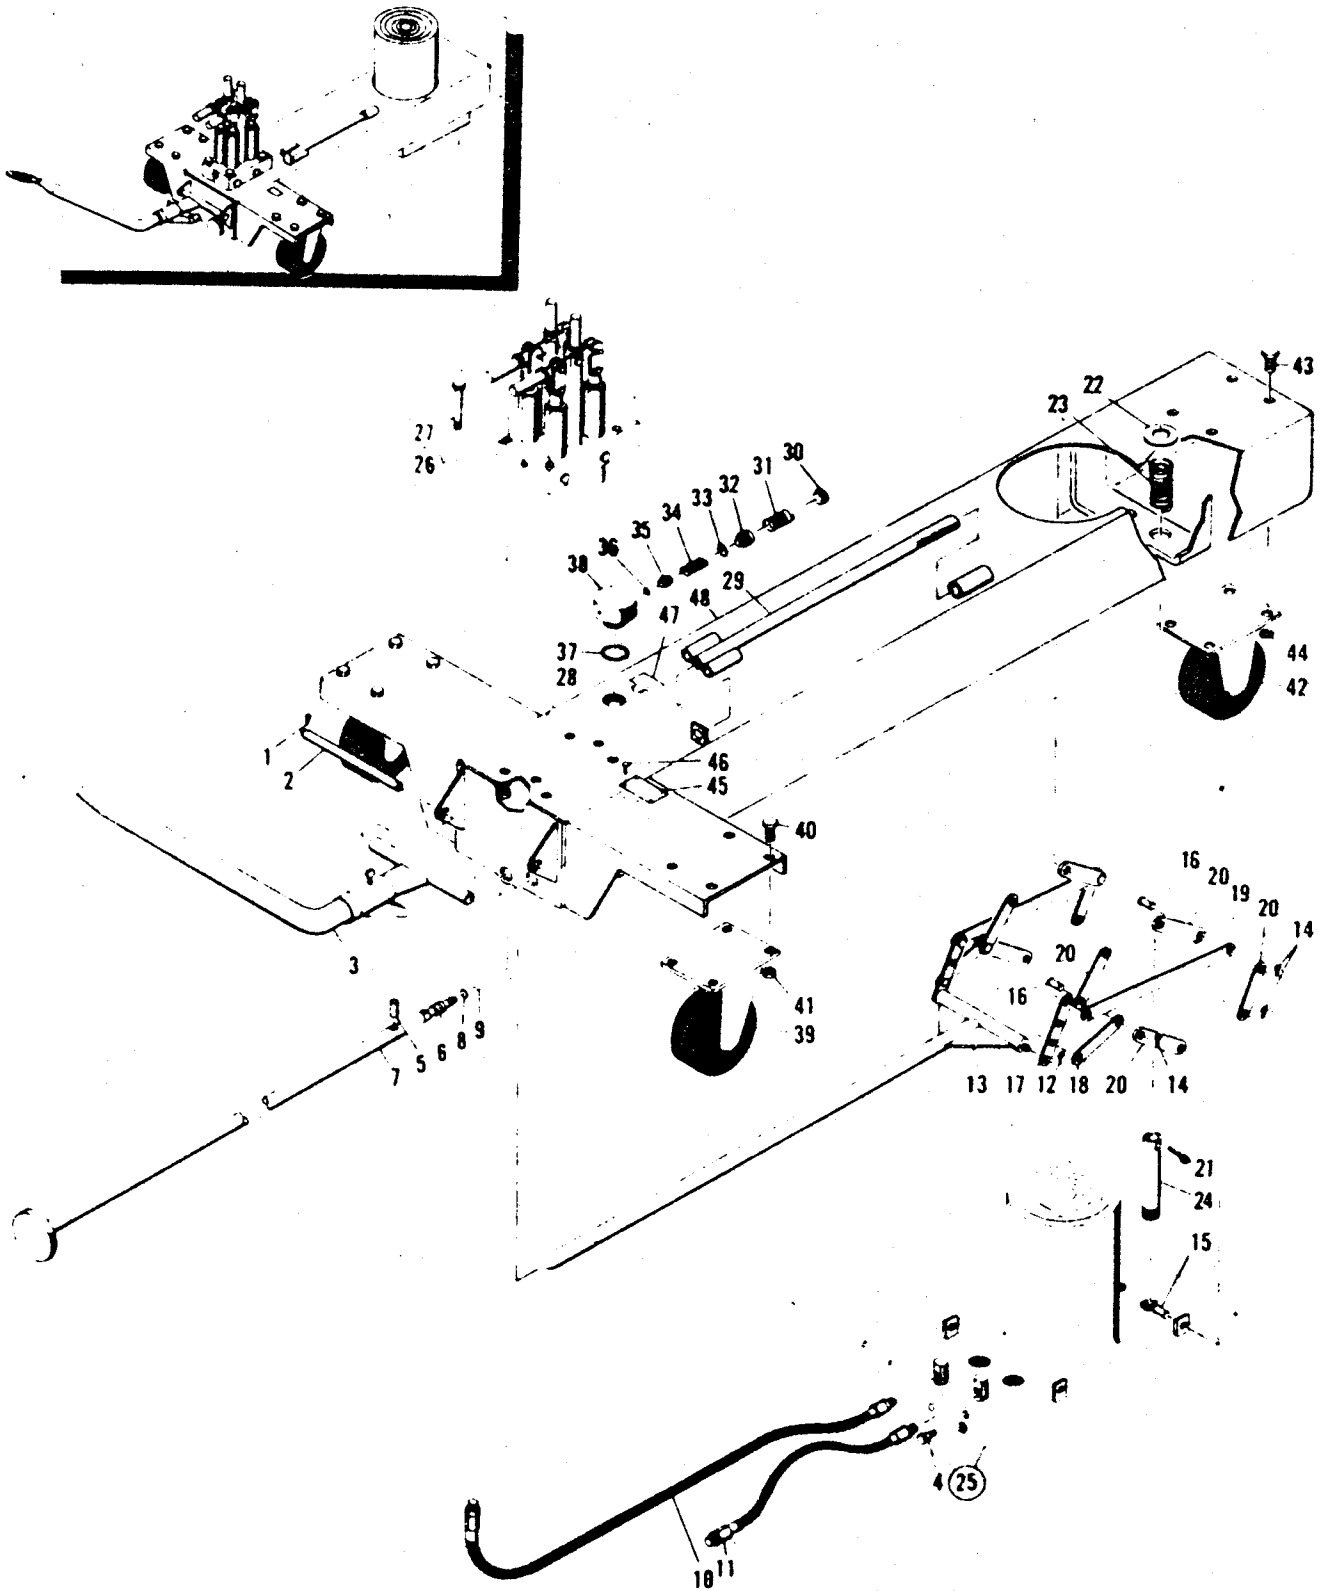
35 Ton Hydraulic Aircraft Hand Jack Assembly,
